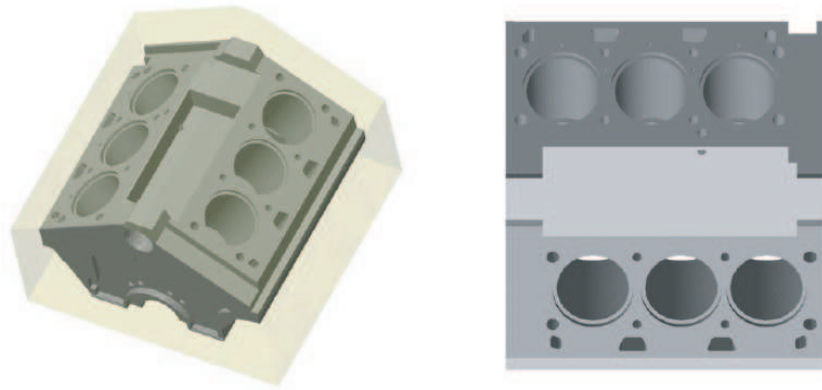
Geometry of a TEKSID aluminium motor-block casting and mould system.
